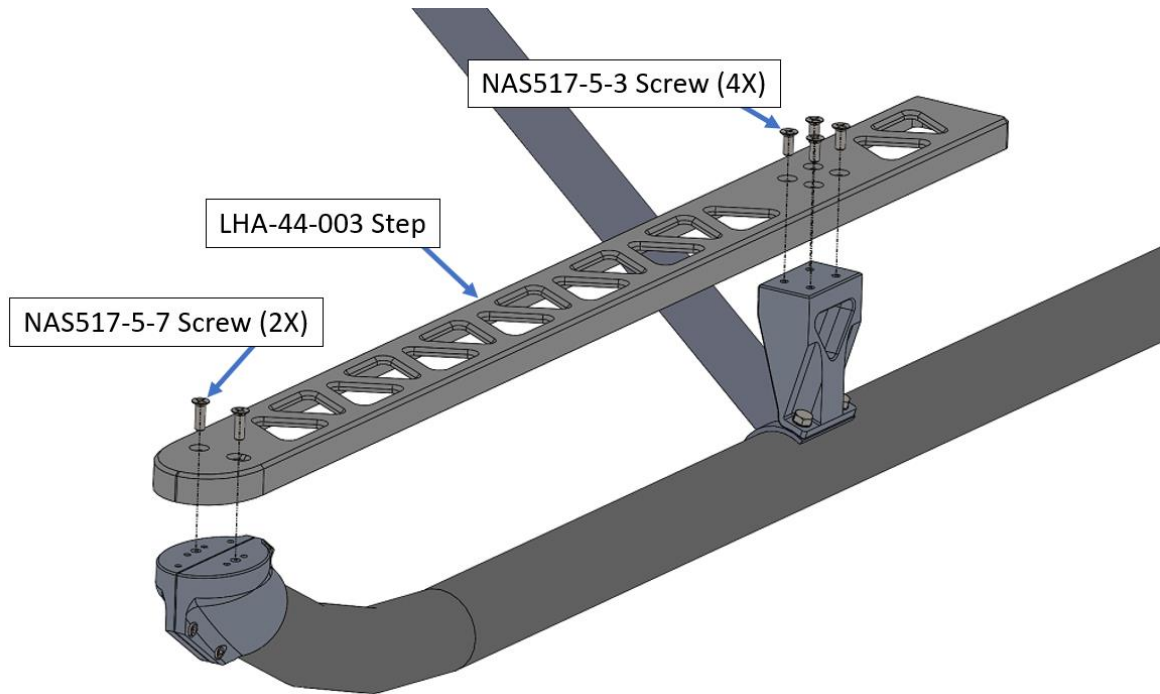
Installation of the LHA-44-003 Step onto the Forward and Aft Attachment Brackets
